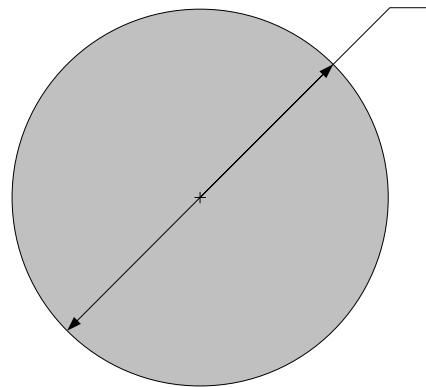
Cross-section dimensions of 1053 and 1070 bar.
